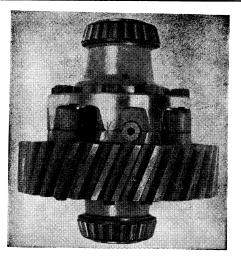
If original identification marks are not clear, center punch differential halves for correct alignment on reassembling
